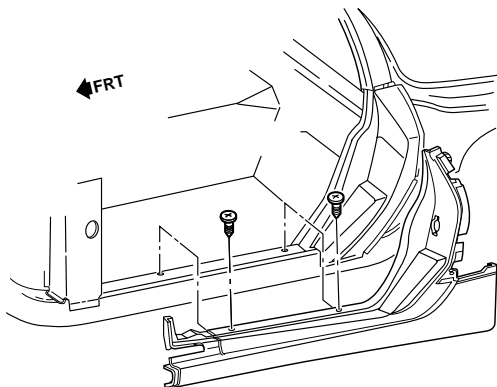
Install Screws to Secure Panel While Adhesive Cures. Also Apply Adhesive to the Lower Edge of Rocker to Bond at Bottom Side of Rail.
